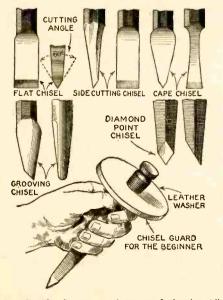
The five general types of chisels. All should be adjusted to a 60° cutting angle for work.
